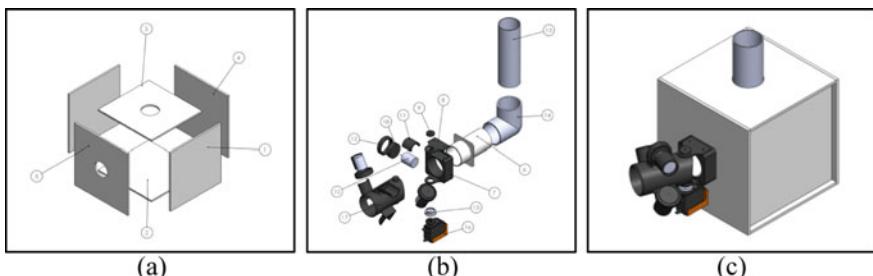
Detailed design that shows a exploded view of the body component, b exploded view of shooter component and c assembly view of table tennis robot launcher
